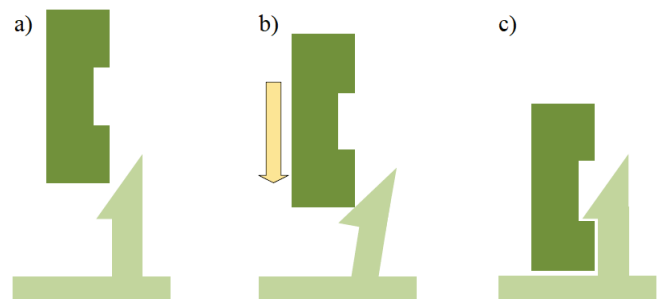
Snap-Fit Joint: a) separated, b) joining process, c) assembled
